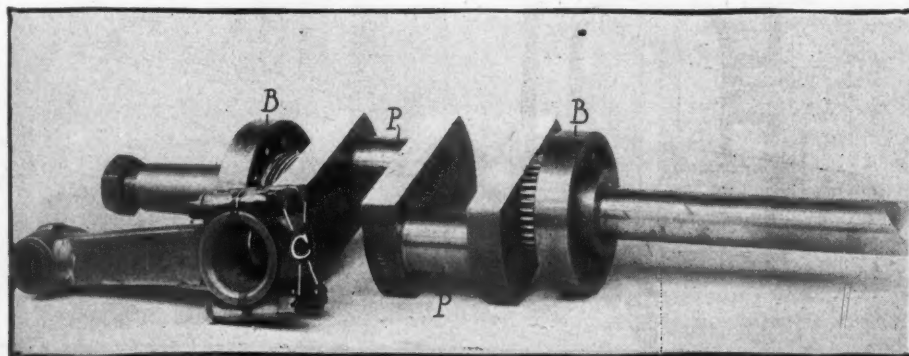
BALL-BEARING CRANKSHAFT ON DAVIS MOTOR
